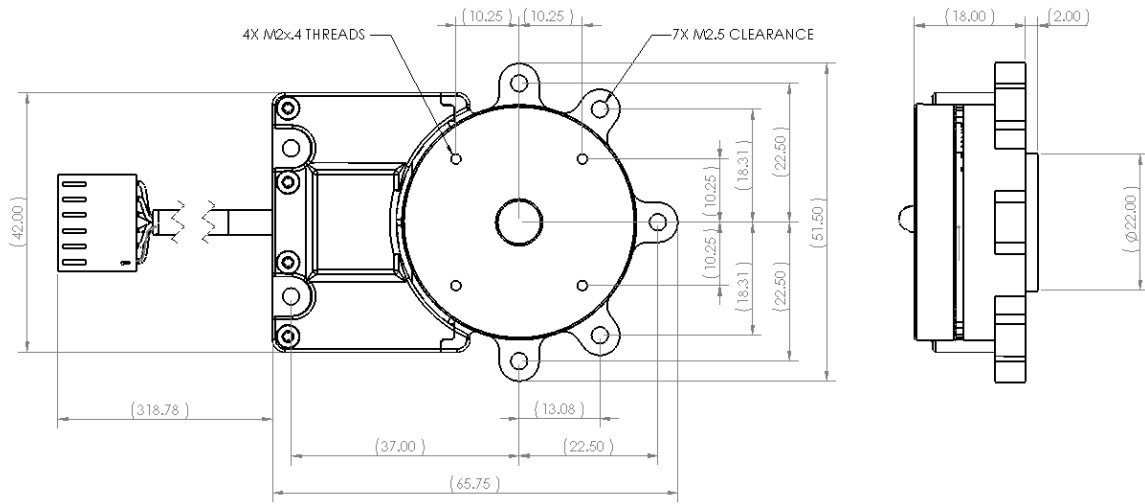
Schematic drawing (mm) of Model # PM-1124R-HS
